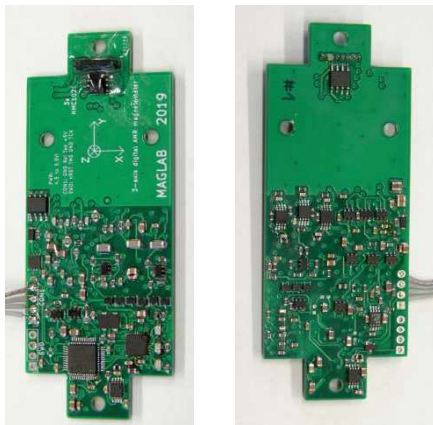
Photo of magnetometer prototype (left - top side, right - bottom side)
